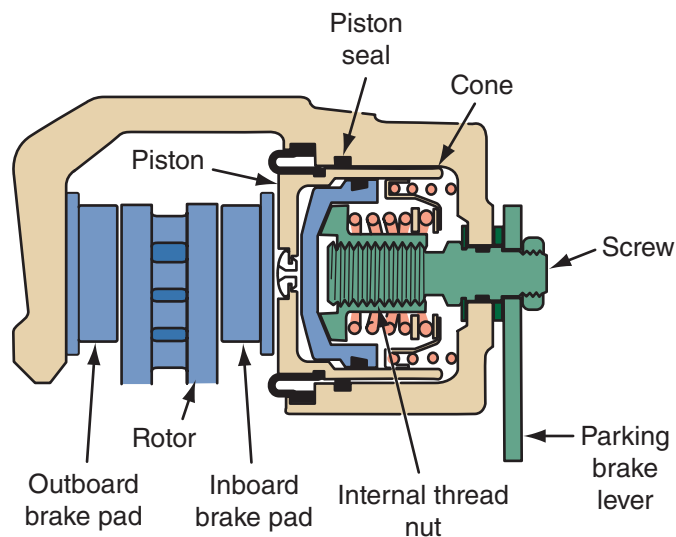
A GM screw-and-nut parking brake mechanism for a disc brake.
